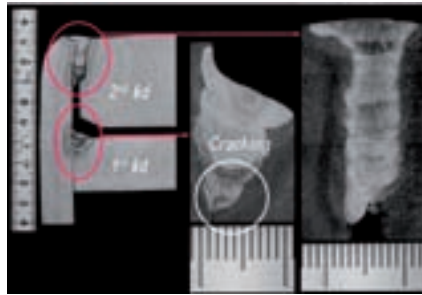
Magnified view of the cut section of the directly impacted welded part of the horizontal drop tested canister.
